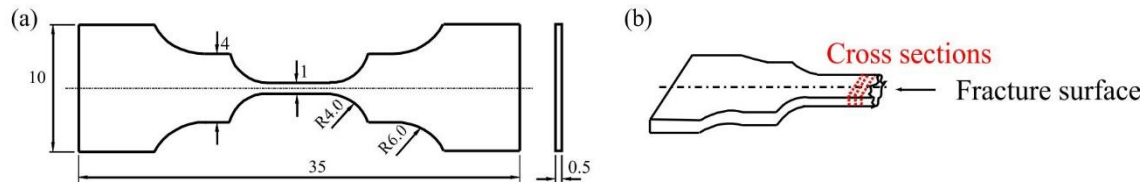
(a) Specimen geometry for slow strain rate tensile test (all dimensions are shown in mm) and (b) schematic of subsurface characterization direction.
